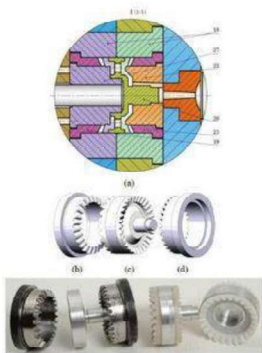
Pressure injection molding form: (a) - the local section of the wheel-satellite forming node of the 2K-H precessional gear; (b), (c), (d), respectively, 3D views of the molds with tooth profiles of the teeth and the wheel-satellite; (e), (f), (g), (h) - respectively, manufactured samples of dies, crank shaft and satellite wheels.
